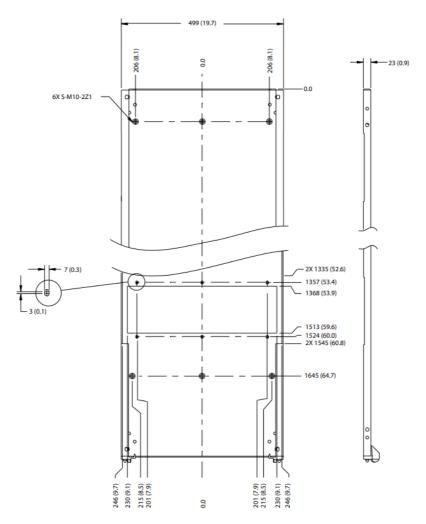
Vent Dimensions for Mounting Plate in 600 mm (24 in) Cabinet
